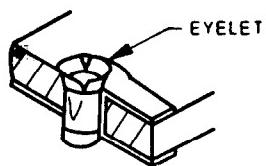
DEFECTIVE PLATED THROUGH HOLE — EYELET METHOD
